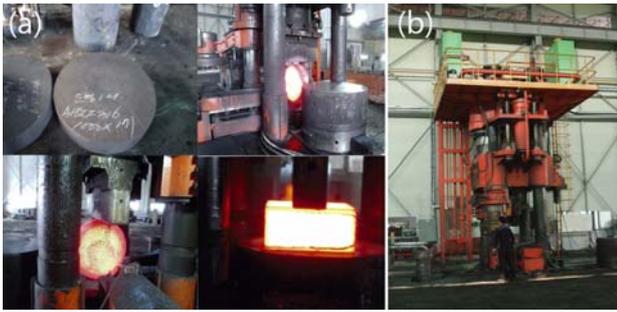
(a) Forging process of weight material and (b) 30 t batch forging press
